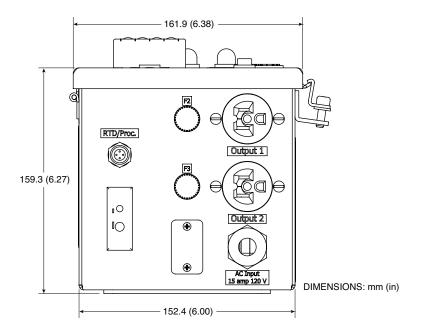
CNi-CB120SB Mounting Dimensions, Bottom View
